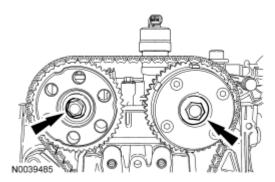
Identifying Camshafts Sprocket Bolts Courtesy of FORD MOTOR CO.
